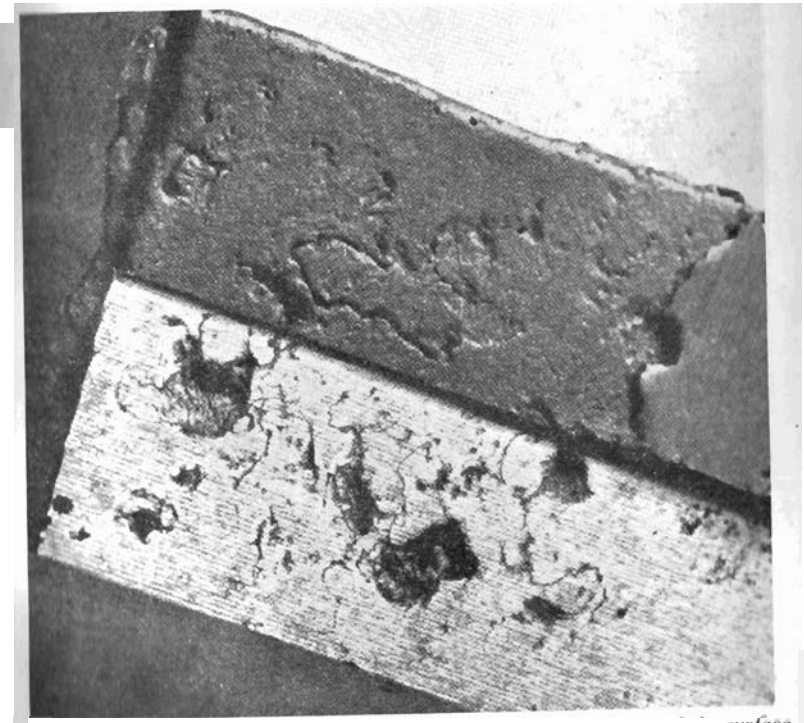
Inclusions in an spheroidal graphite iron casting. Part of the surface has been machined away to show the nature of the defect more clearly.
